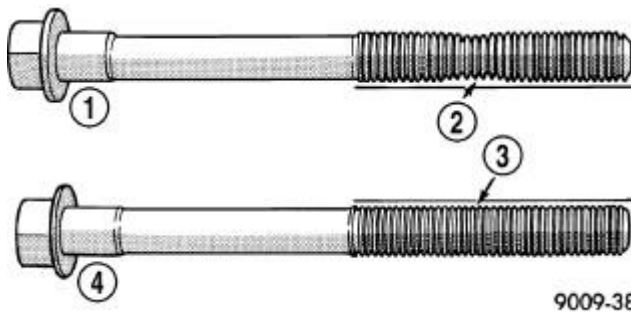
Checking Cylinder Head Bolts For Stretching (Necking)
